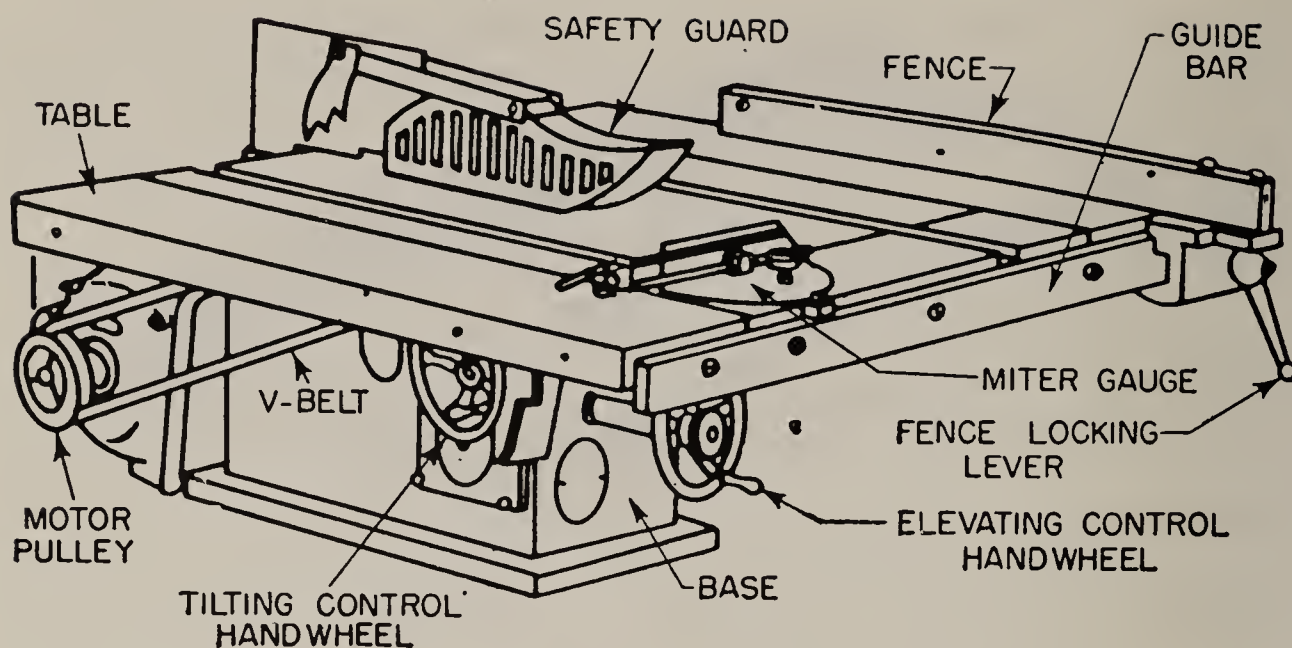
Typical eight-inch, tilting-table saw. It has a speed of 3,450 rpm and is equipped with a cast-iron table, fence, miter gauge, and a safety guard which includes two antikickback pawls and splitter. Elevating mechanism consists of a handwheel which tilts the table by screw and nut action.
